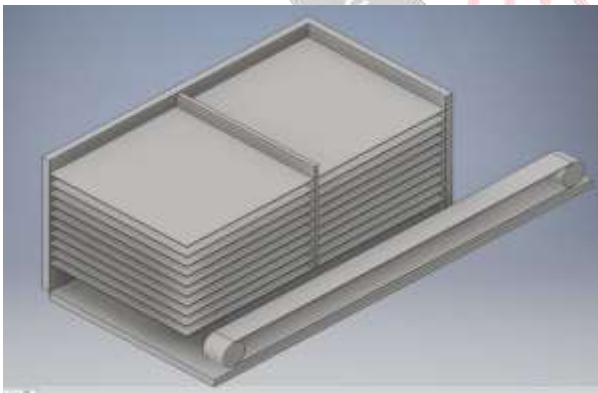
Belt conveyor inside the truck and rack arrangement.
